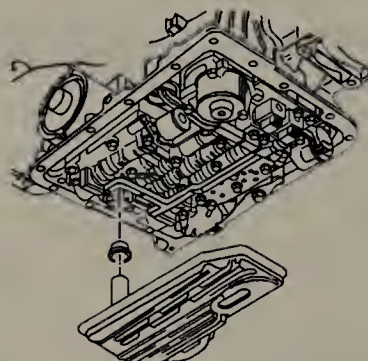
If the filter seal does not come out of the filter, it is stuck in the transmission case and must be removed
